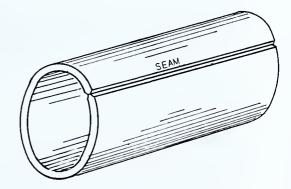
Rolled Cylinder Ready for Welding
